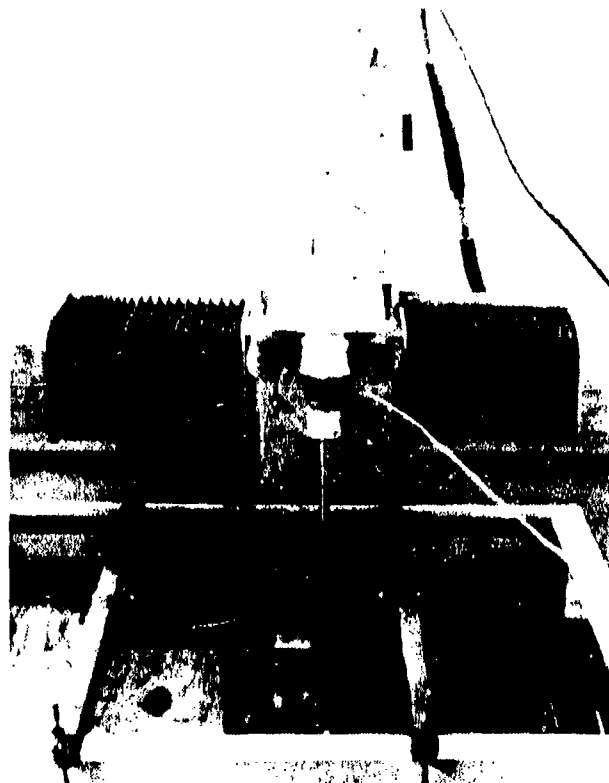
Experimental Setup for Milling with Single-Angled Rotary AWJ Tool
